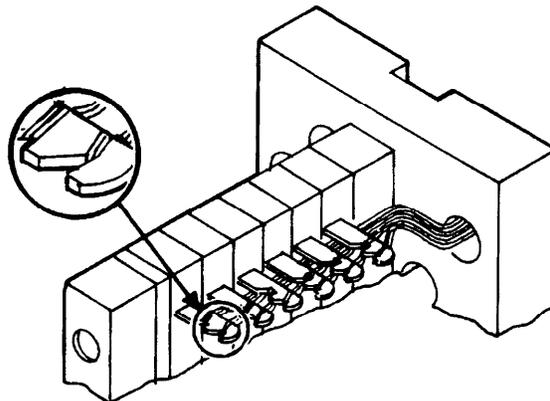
Connecting 3 or 4 Wires per Pin.
